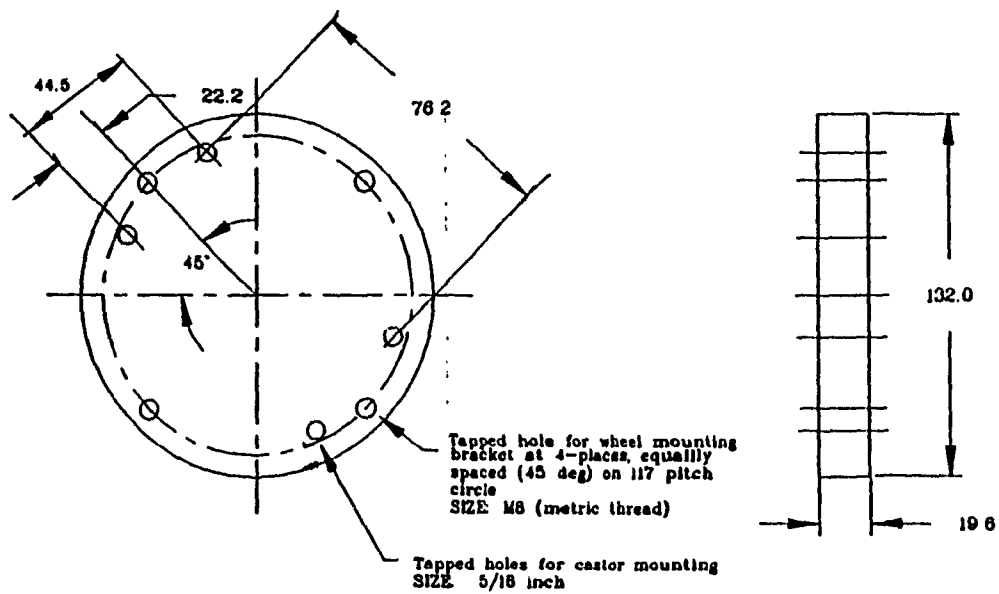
Lower Level Weldment with Motor-in-wheel Drive Units
